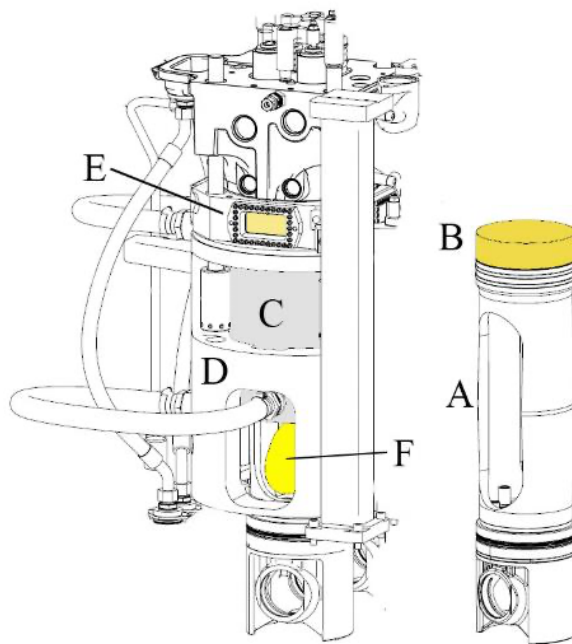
Bowditch engine design, assembly and extended piston. Optical parts in yellow.
